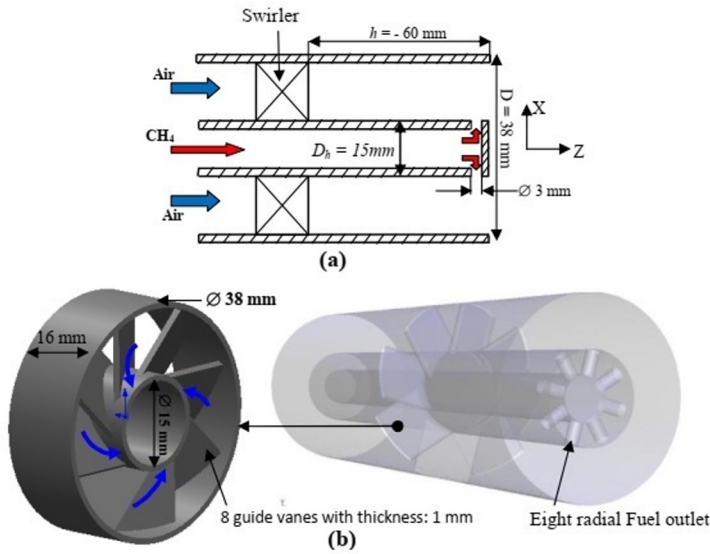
2D view of burner dimensions (a) and 3D view of the swirled burner (b)
